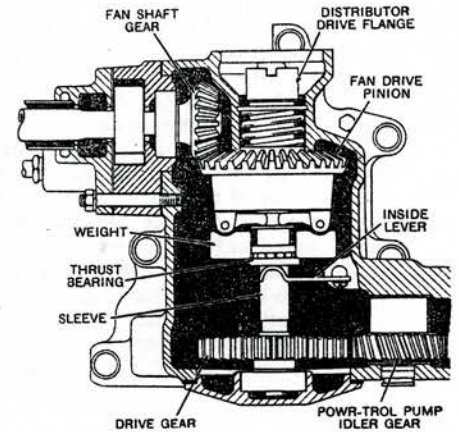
A Cutaway view of Model 60 governor. Model 50 is similar
